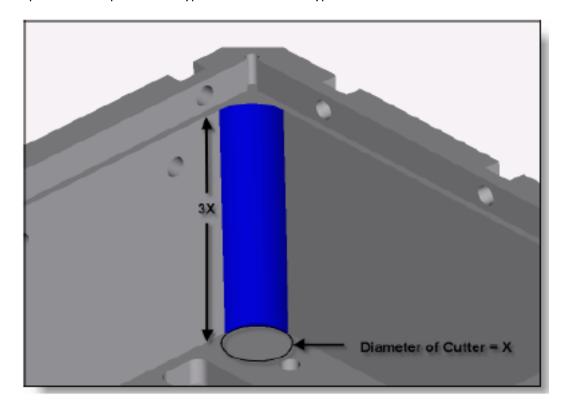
Short and Rigid tool can cut this. Source: Pro CNC Inc.
